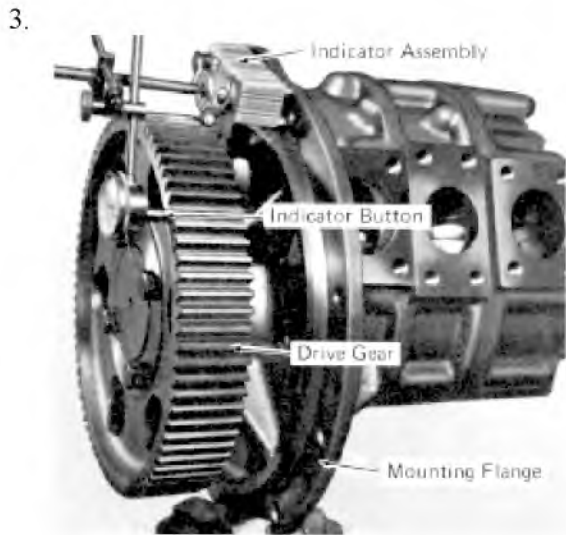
Checking Pump Drive Gear End Thrust
